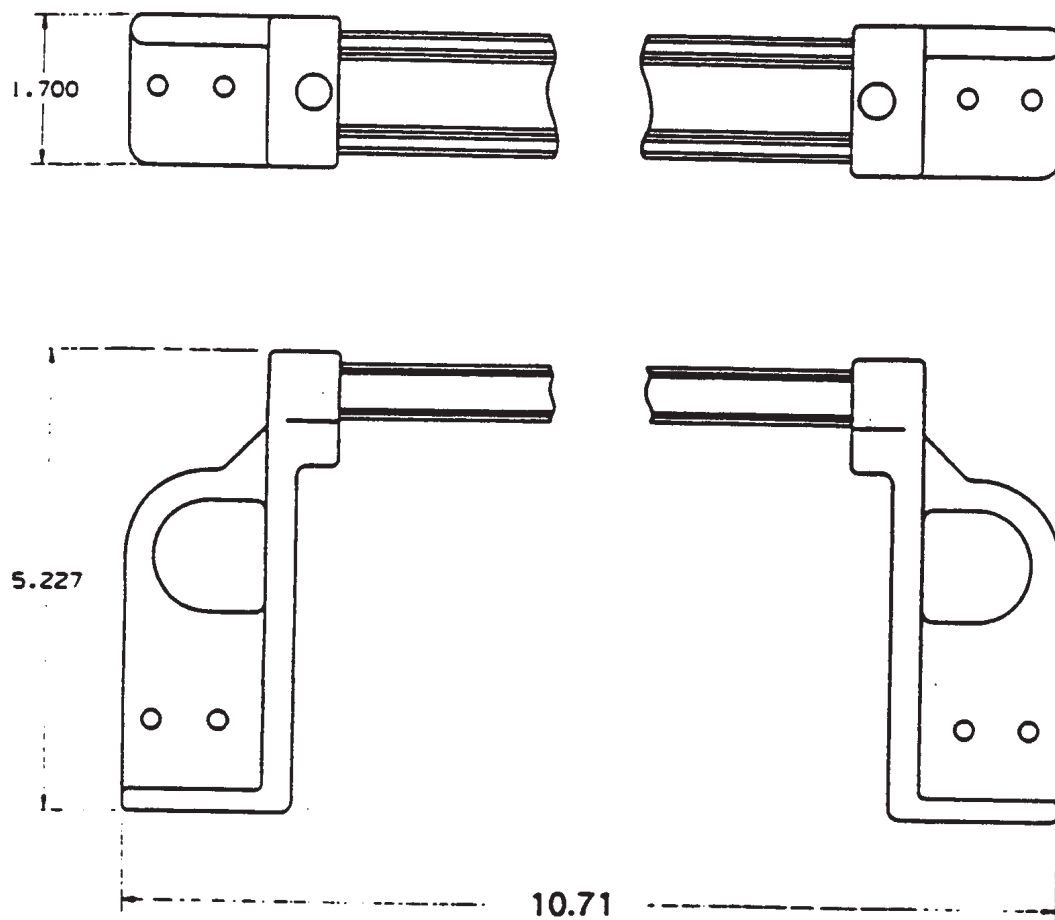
SHORT SIDE MOUNTED HANDHOLD ENVELOPE (GROUND INSTALLED)
